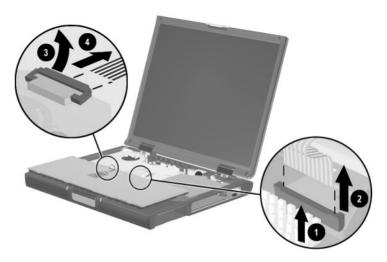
Disconnecting the Keyboard-to-TouchPad Cable
